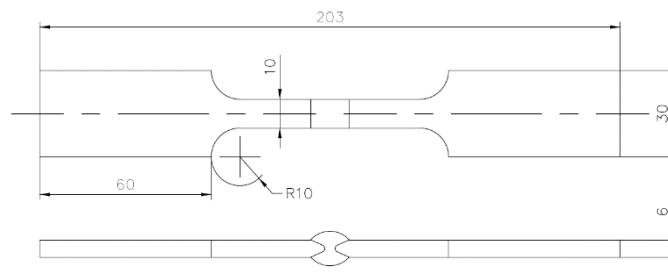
Dimensions for tensile and fatigue test specimens (mm).
